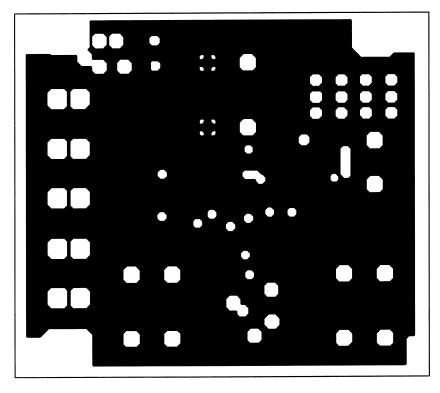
Recommended LQ PC Board Layout: Upper Inner-Layer Layout
